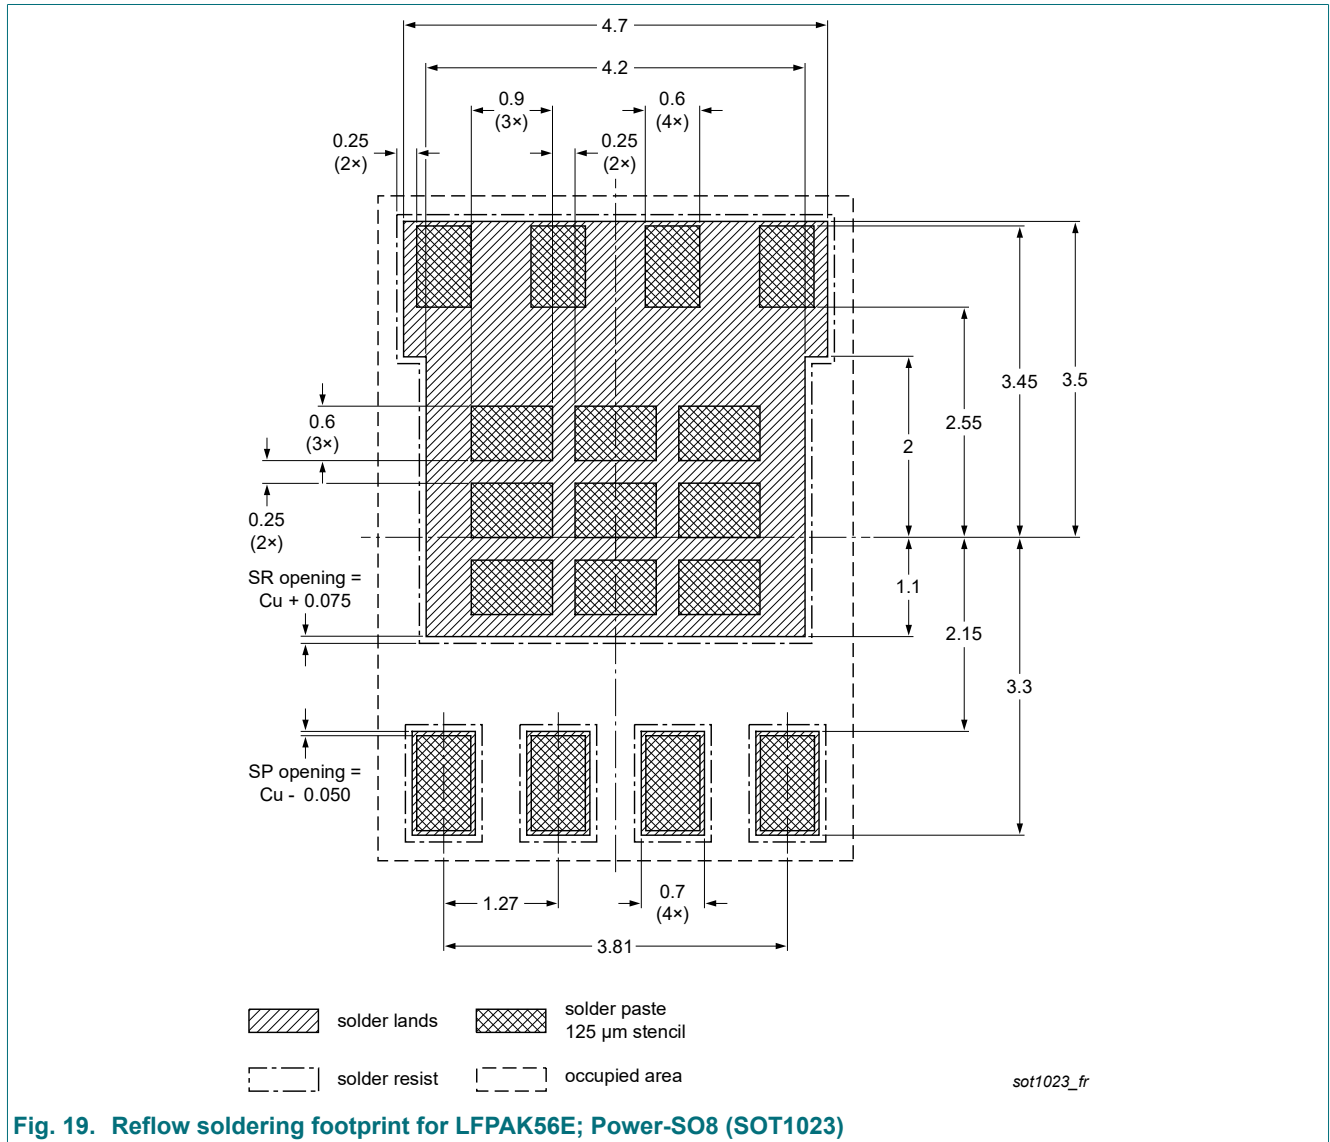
Reflow soldering footprint for LPAK56E; Power-SO8 (SOT1023)
